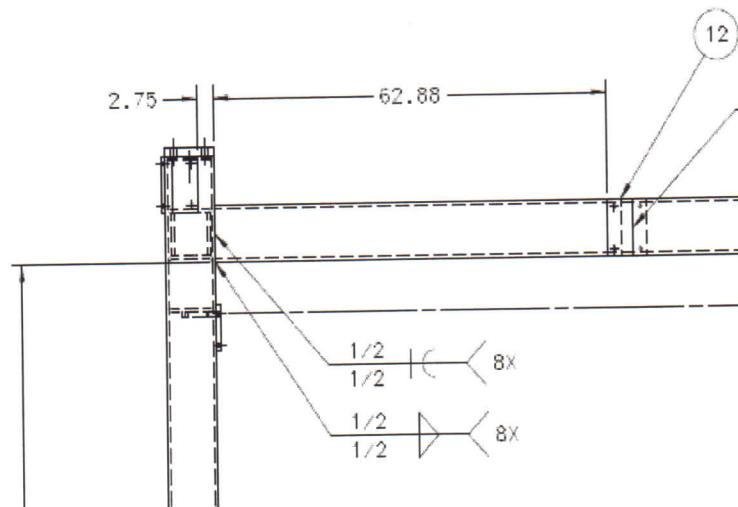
, The partial view of the main frame drawing ME-435903 (related to the tubing Weld in discussed area)
